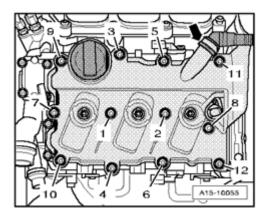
Removing Crankshaft Housing Ventilation Hose & Left Cylinder Head Cover Bolts In Sequence
